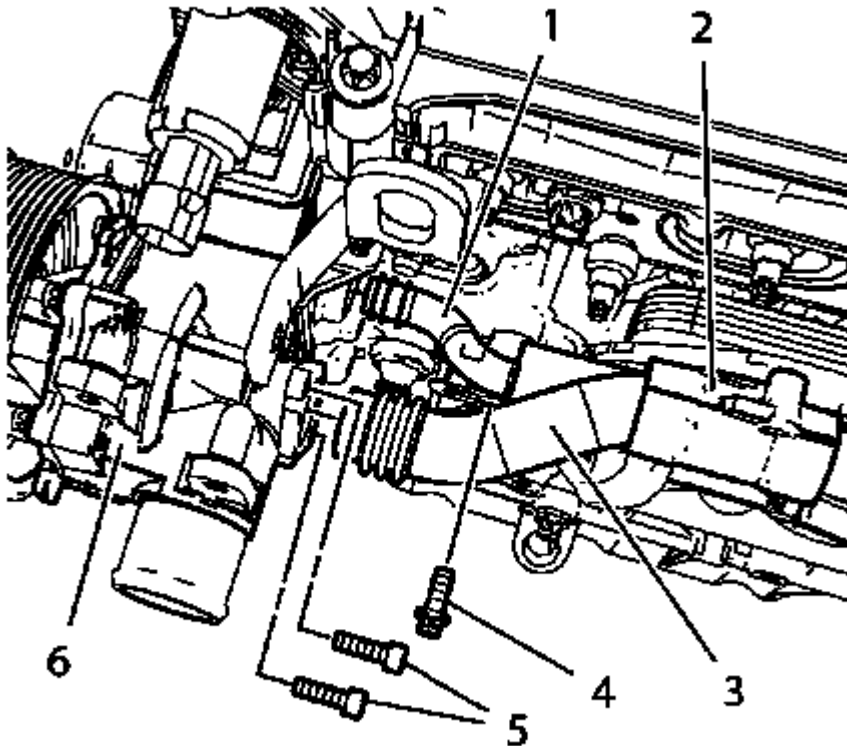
Engine Oil Cooler Housing, Engine Oil Cooler Inlet Pipe And Engine Oil Cooler Outlet Pipe
